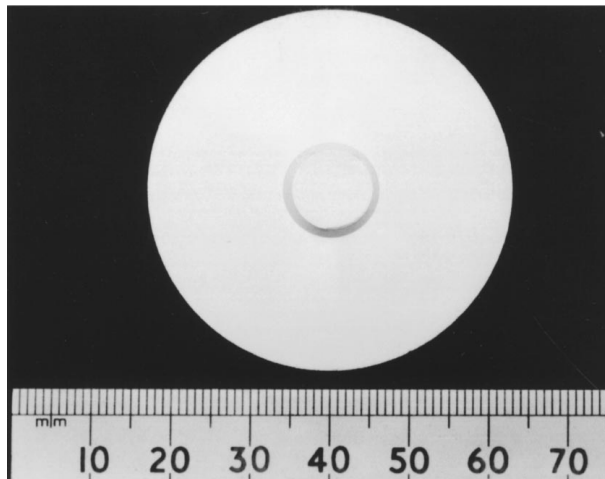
Green-machined 3Y-TZP disc (top view) depicting size of ‘pip’ remaining on the surface after fracture from the green blank.
